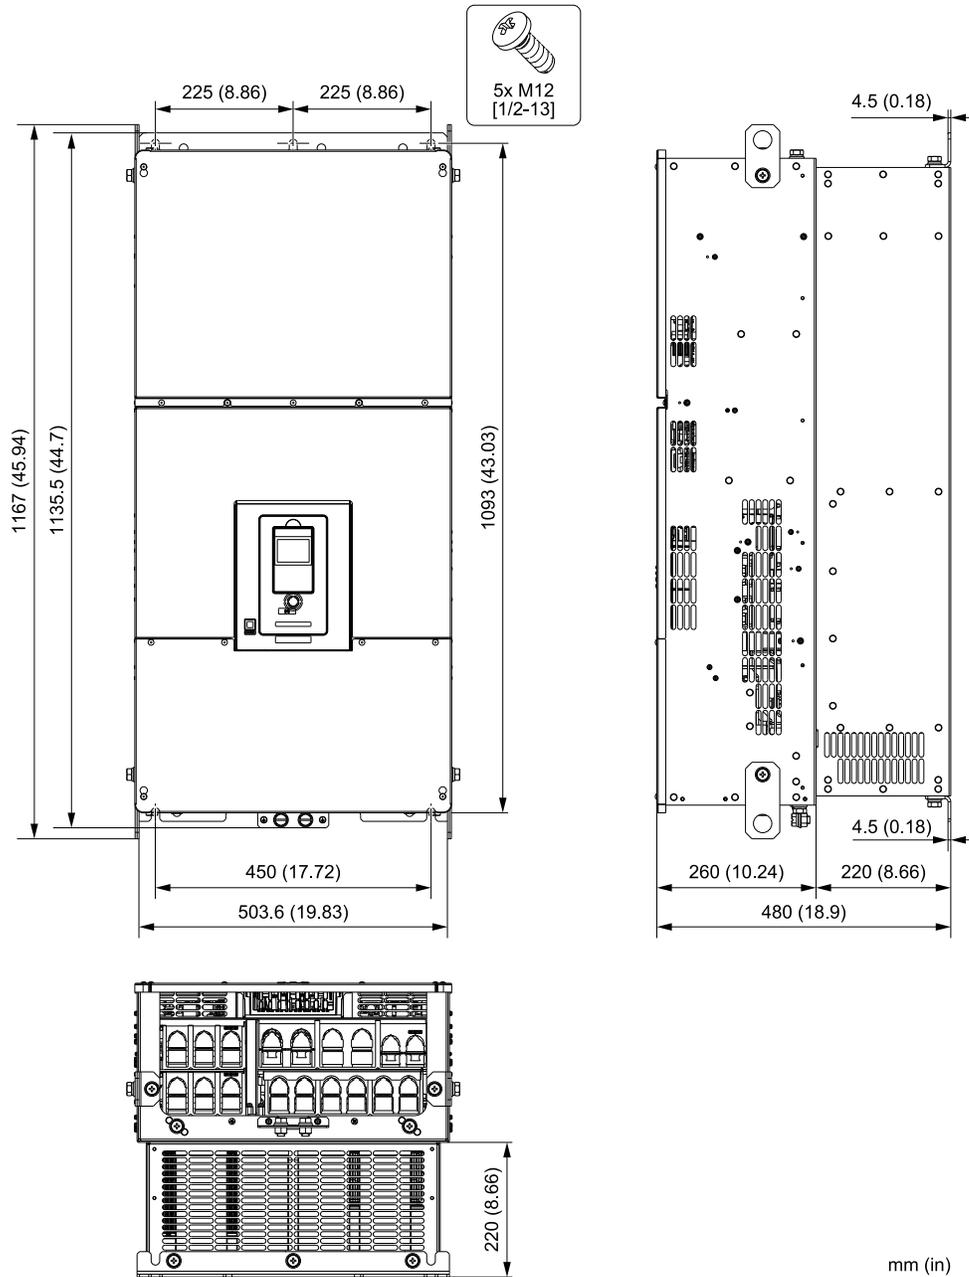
Exterior and Mounting Dimensions Diagram 3
